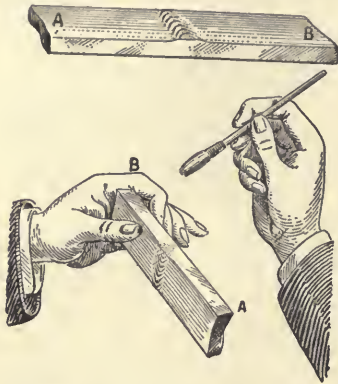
Tests of welds by corrosion ; on top, the weld polished ; below, applying the etching solution.
